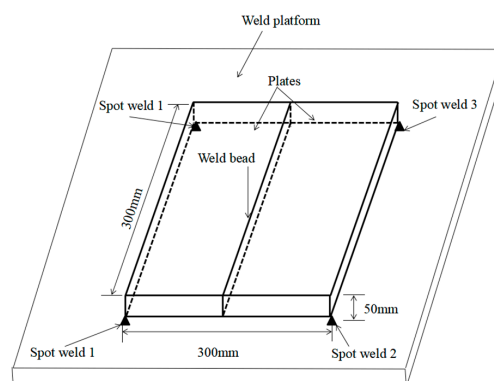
Diagram of the dimension and clamp conditions of the testing coupon.
